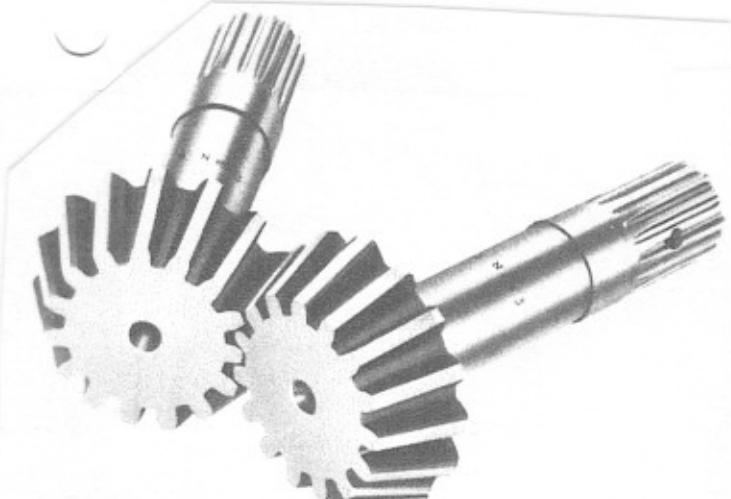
Straight bevel gears. [Courtesy Eaton Corporation, Industrial Drives Division.]
